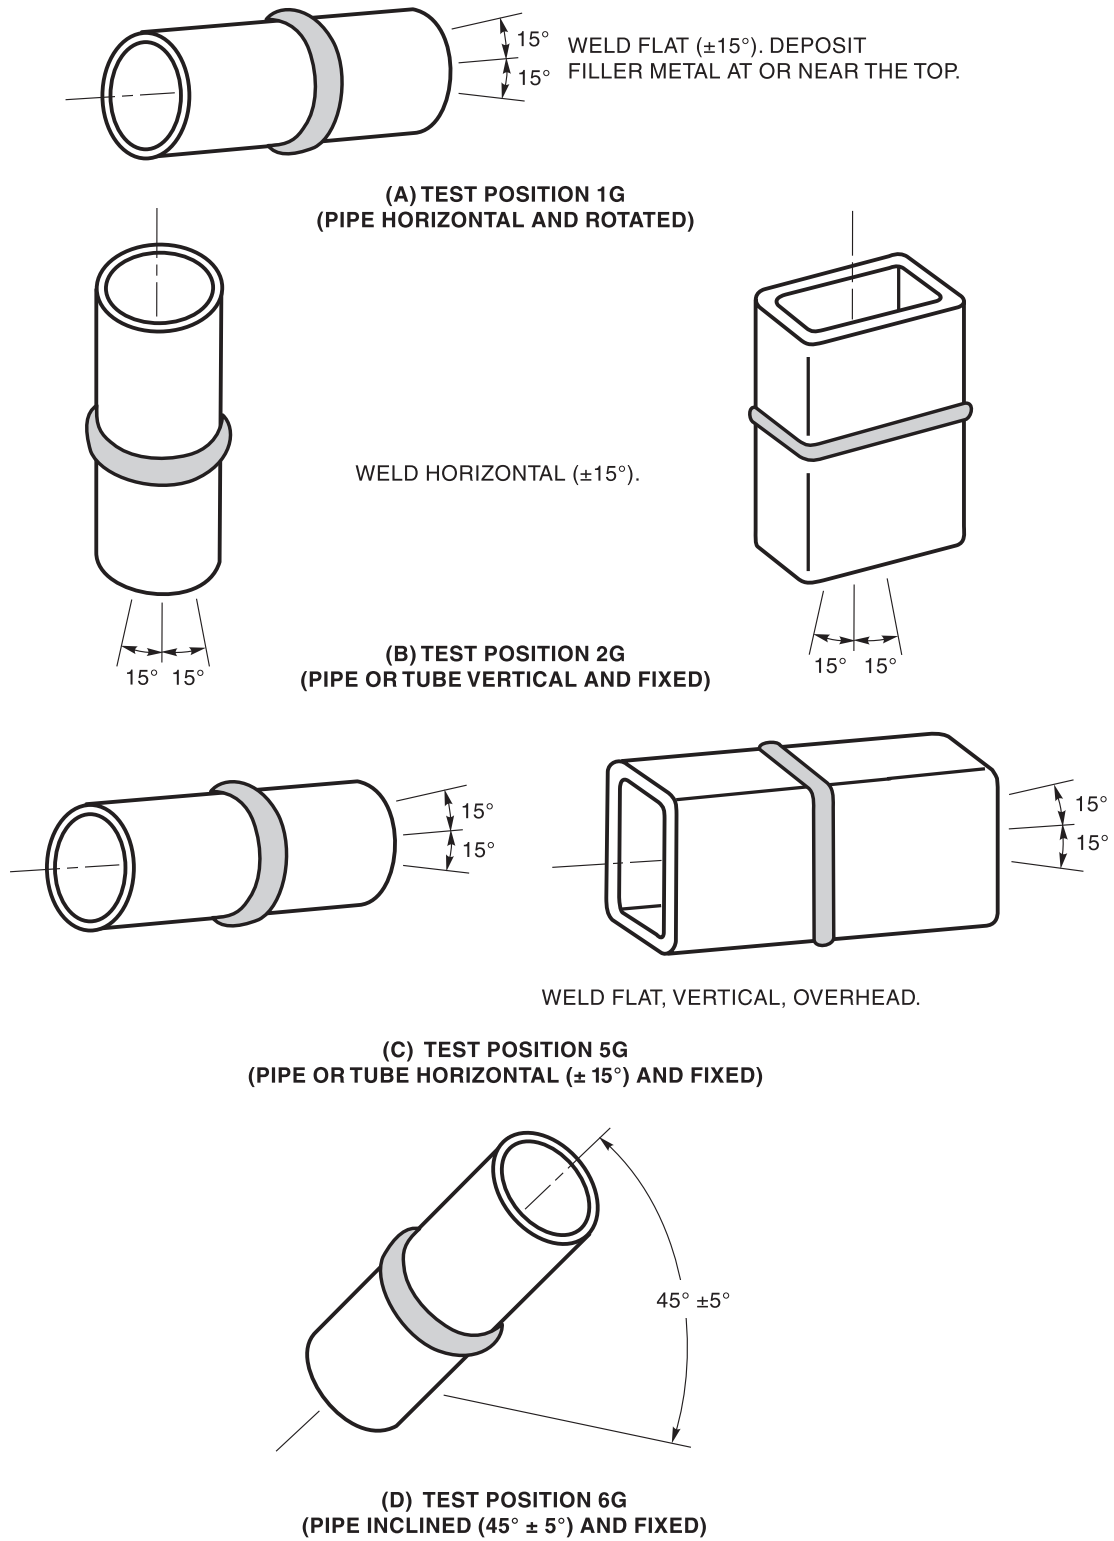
Positions of Test Pipe or Tubing for Groove Welds
